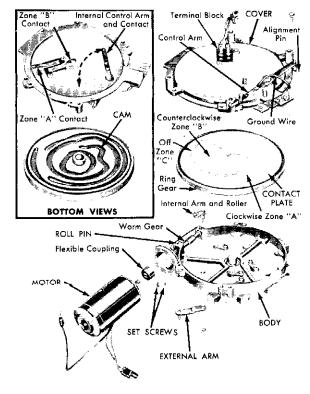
Servo Assembly Disassembled-1958-(E-2614)
